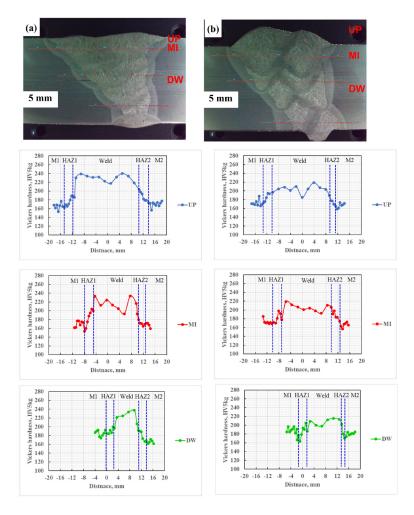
The macro-metallography of weldment and hardness distribution of (a) FCAW and (b) MCAW weldment
